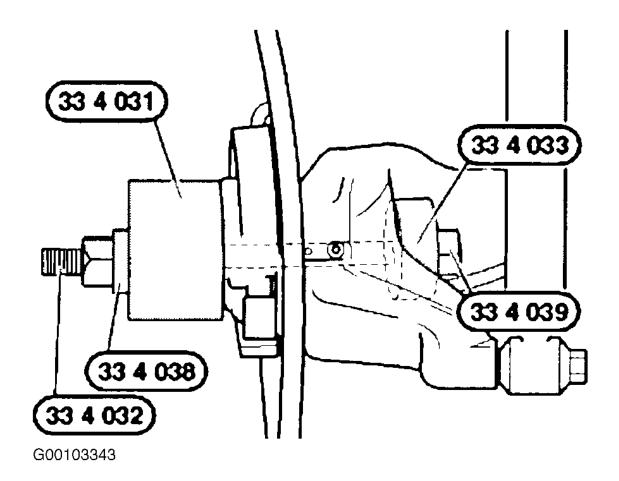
Removing Wheel Bearing (Z3 2.8) Courtesy of BMW OF NORTH AMERICA, INC.
